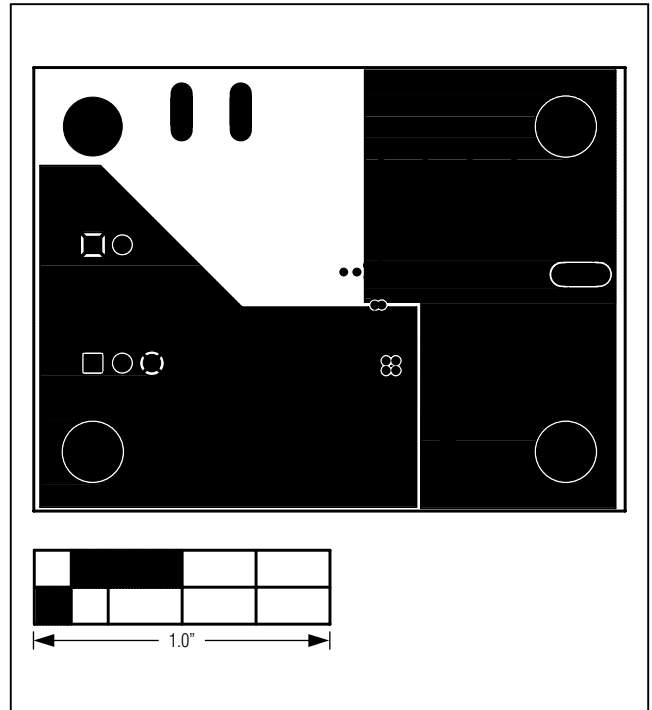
MAX8989 EV Kit PCB Layout—Solder Side (Layer 4)
